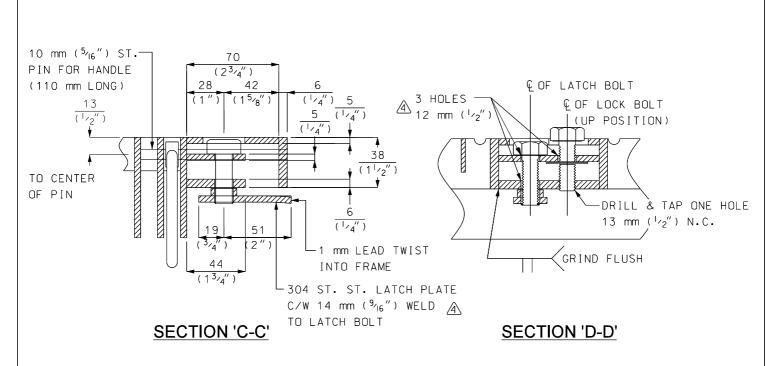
REQUIRED DETAIL 'D'
